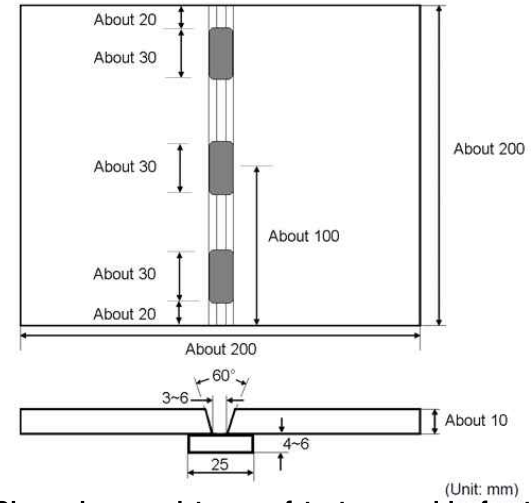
Dimensions and types of test assembly for tack butt welds
